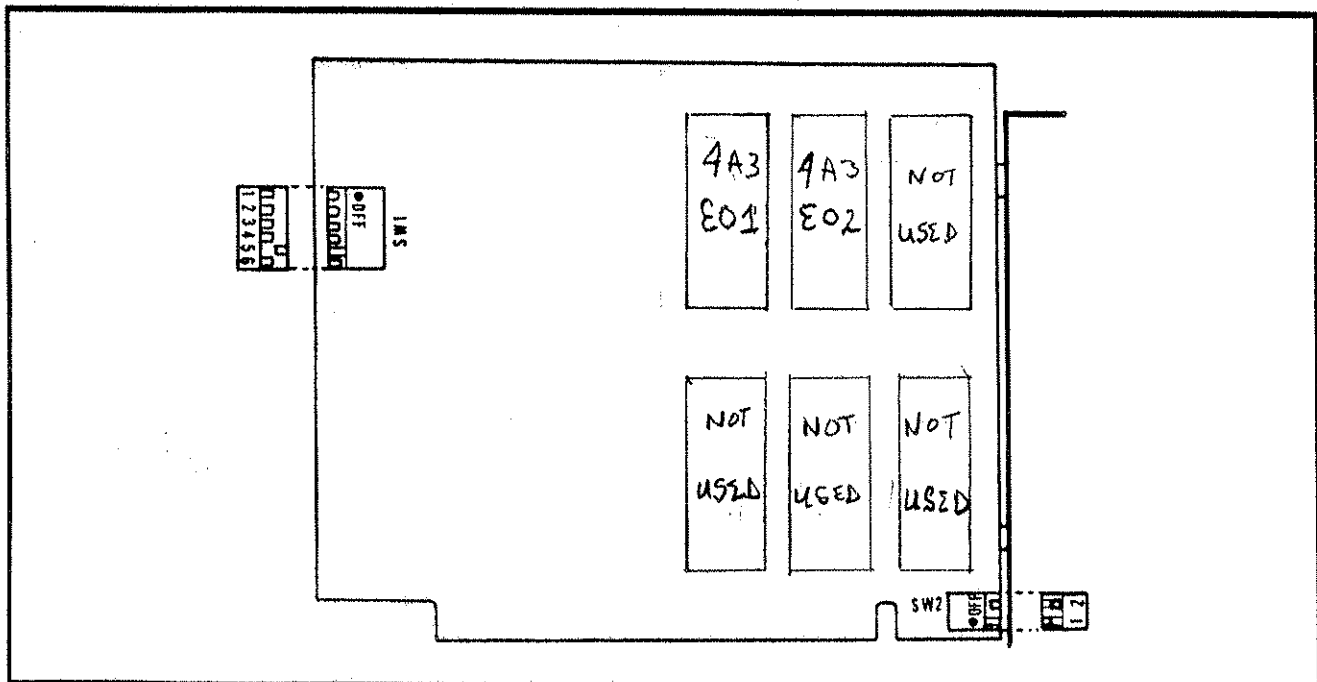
ROM Disk Board Assy 4A3, DIP Switch Settings.
